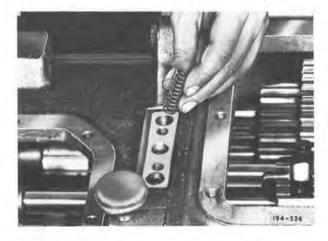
Installing Shift Rail Poppet Ball Spring
